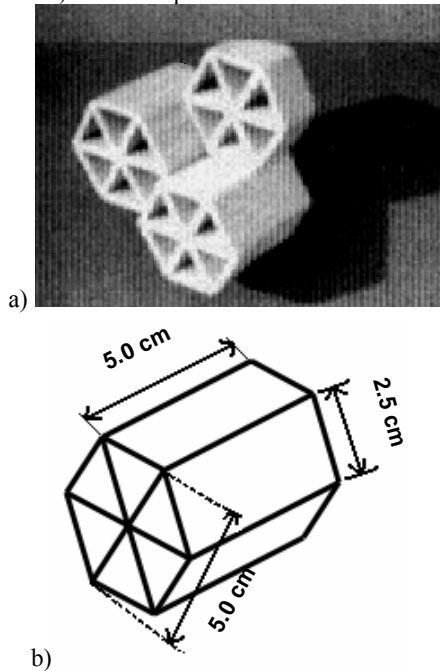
a) Feldspar hexagonal packing, b) Dimensions of the hexagonal feldspar packing.
